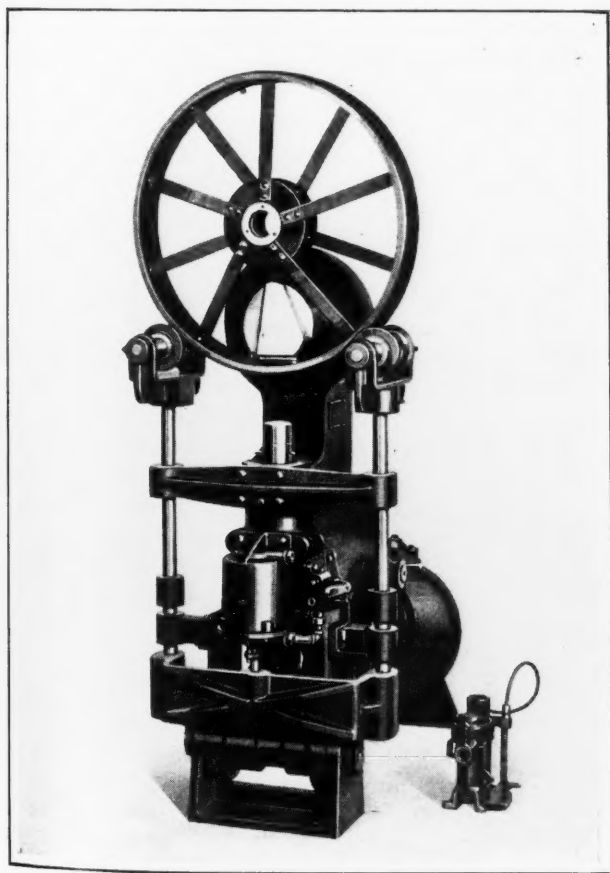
Hanna Riveter for Assembling Spokes to Tractor-wheel Rims
